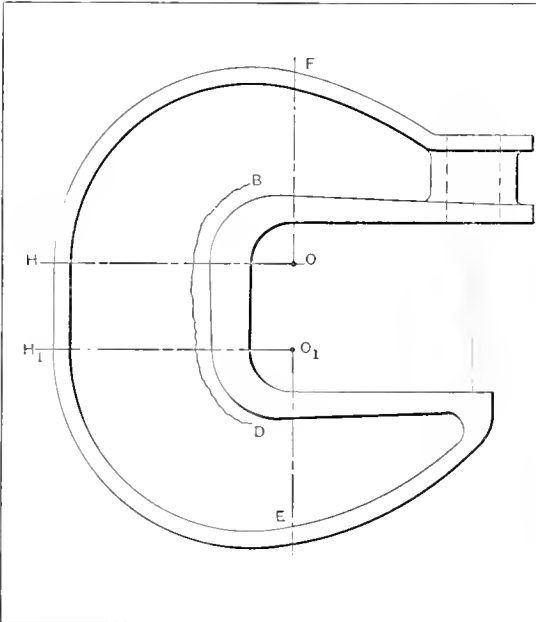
A Small Portable Riveter Frame used for the Purpose of Illustrating Proper Design as indicated in Fig. 9
